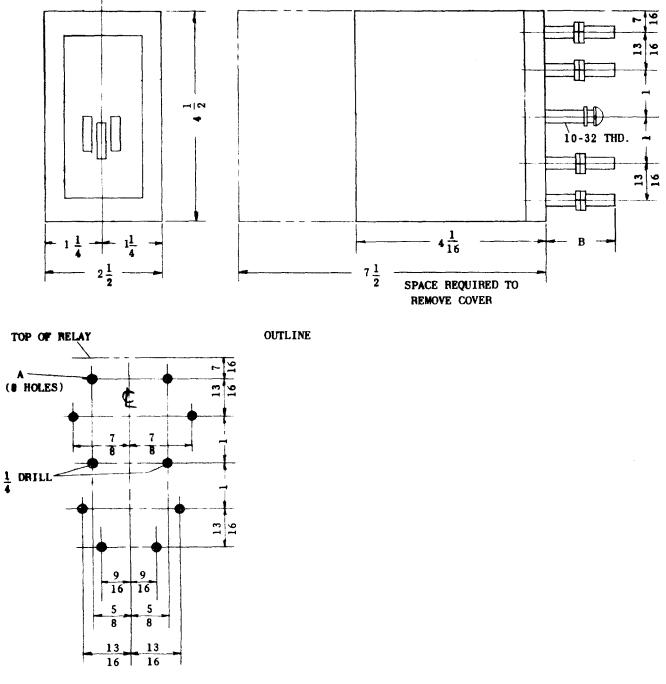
(0148A3978-2) Outline and Panel Drilling Dimensions for the Semi-flush Mounted NLA15A Relay
